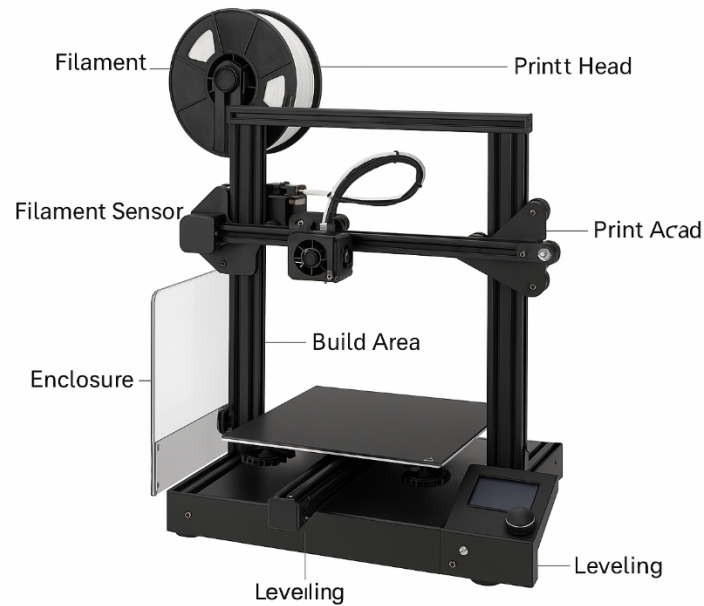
Parts of a FDM 3D printer machine. Open IA (2025).
